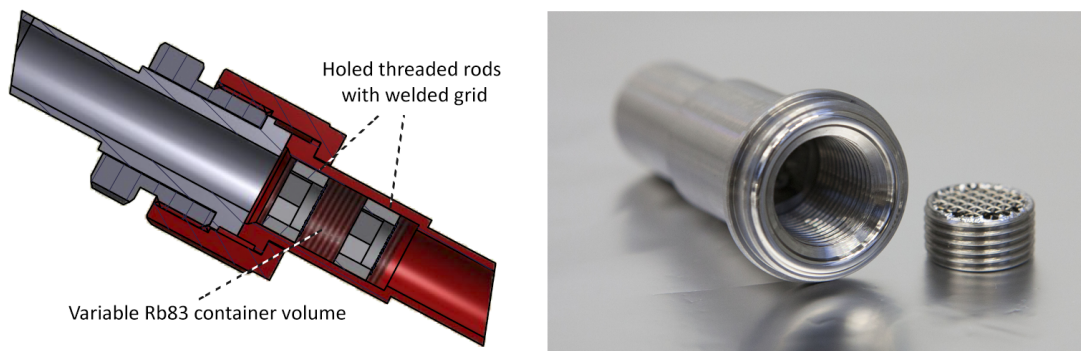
Left:* Technical drawing of the ^{83}Rb container. *Right:* Inside view of the ^{83}Rb emanator. On the right one of the holed threaded rods can be seen.
